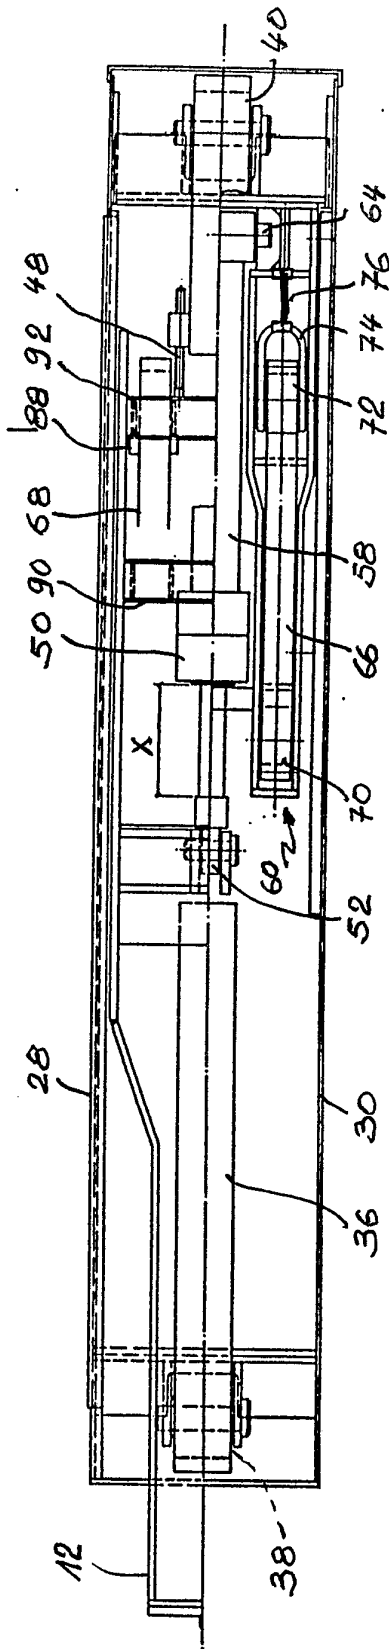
is a side cross-sectional view of the mechanical assembly. It shows a main housing (12) with a central shaft (36) passing through it. A motor (52) is mounted on the left side of the housing. A bracket (60) is attached to the shaft. A component (68) is shown on the right side of the shaft. Other labeled parts include 12, 36, 40, 44, 58, 64, 66, 74, and 80.
